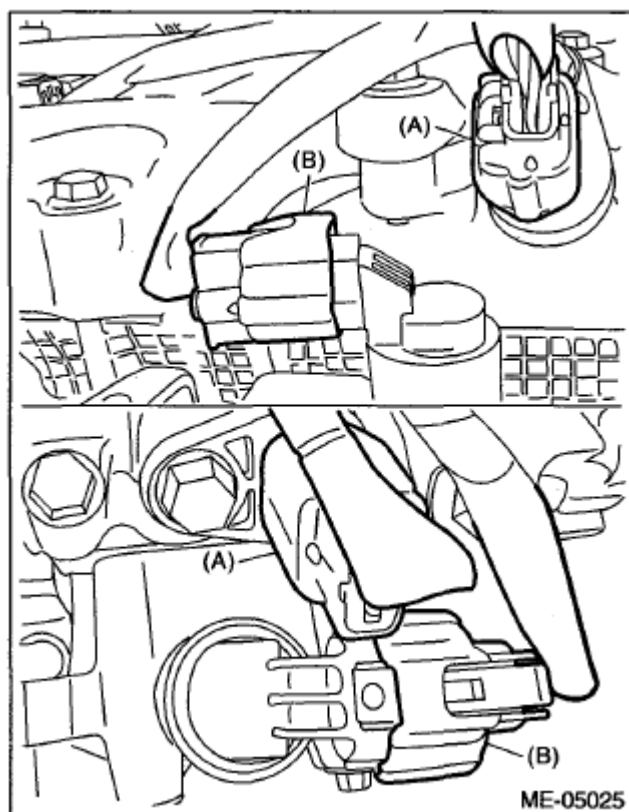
Identifying Exhaust Camshaft Position Sensor Connector And Exhaust Oil Flow Control Solenoid Valve Connector
